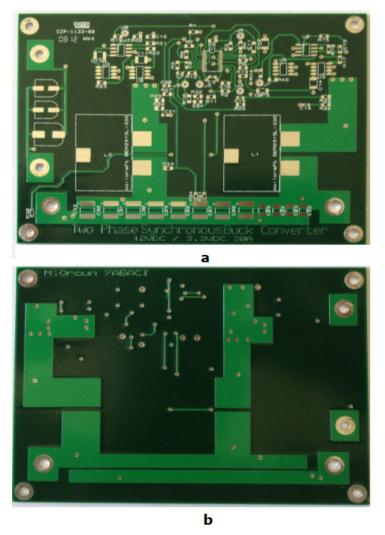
Photos of the designed two-phase buck converter PCB (a: component side, b: solder side)
